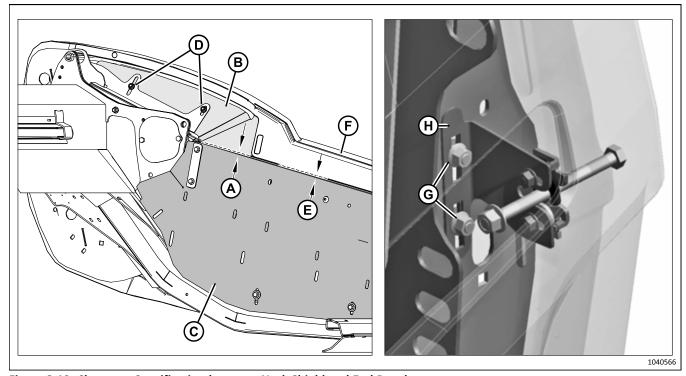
Clearance Specification between Neck Shield and End Panel
